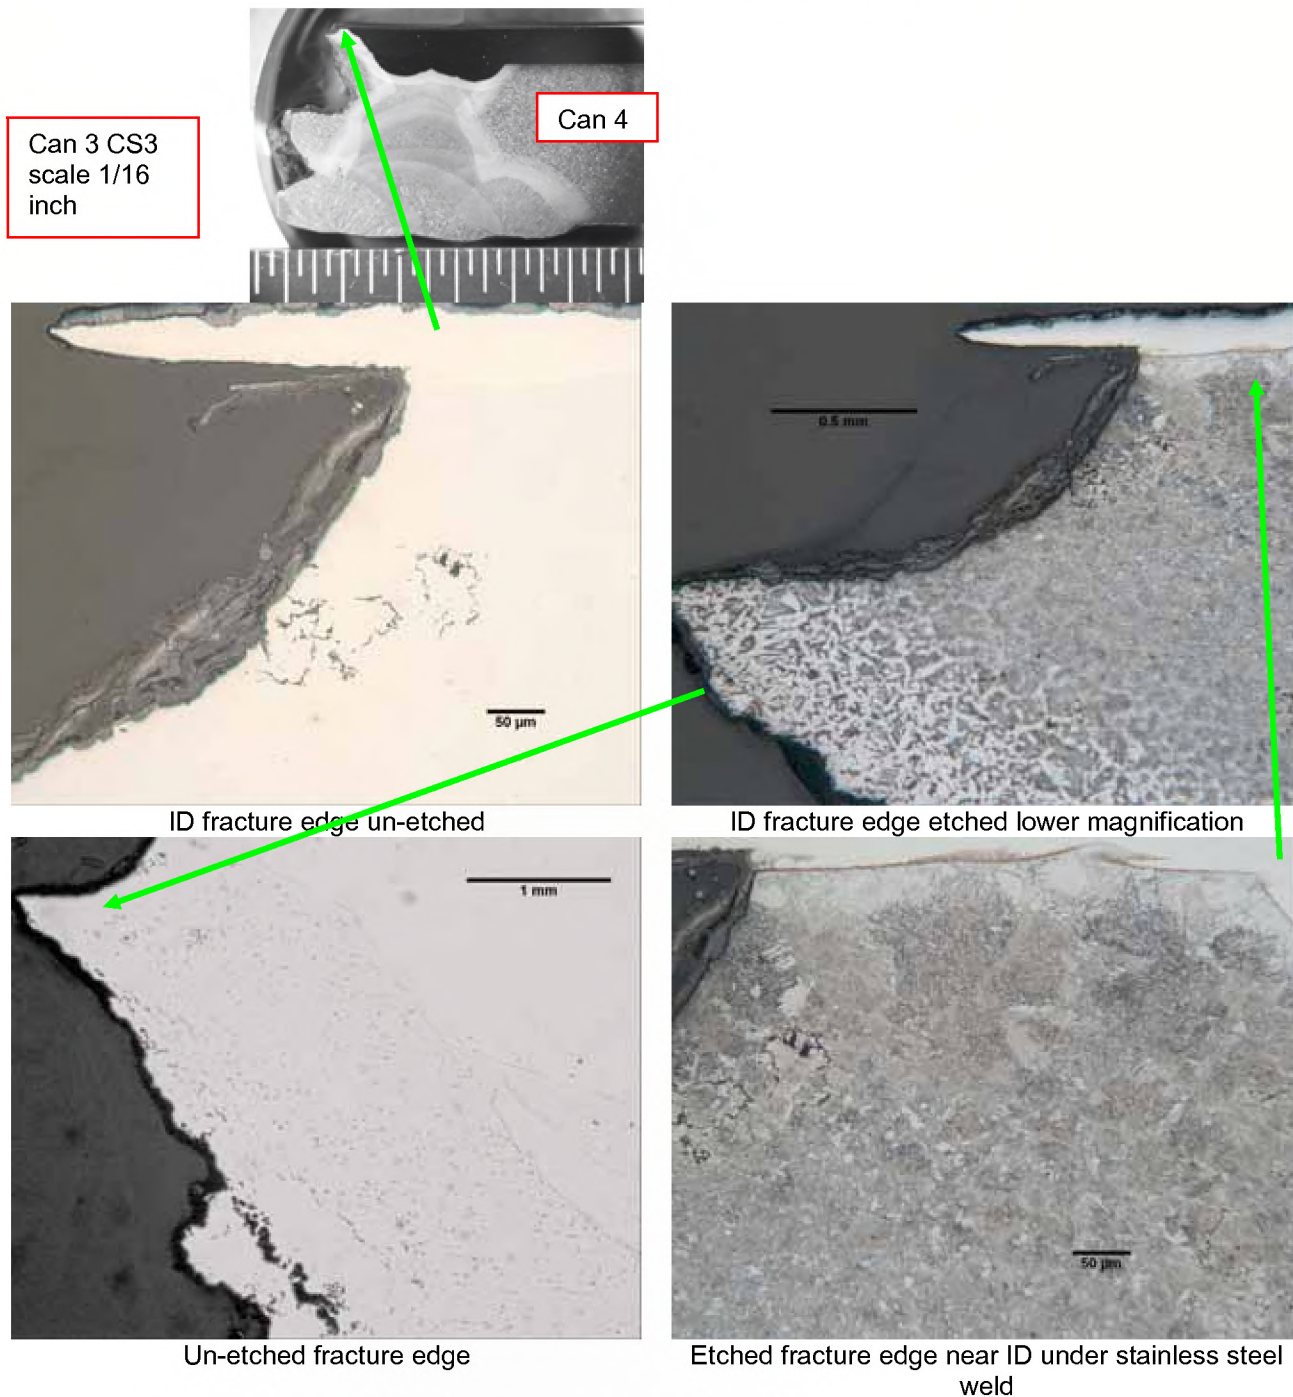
Un-etched and etched fracture edge near ID and under stainless steel weld for mount M1
